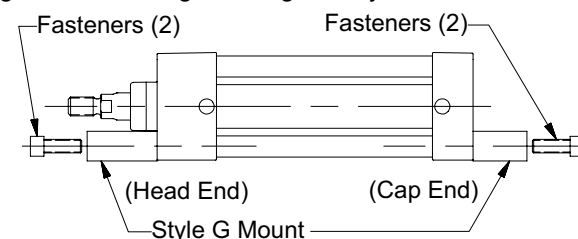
Side End Lug Mounting Kit - Style MS7
